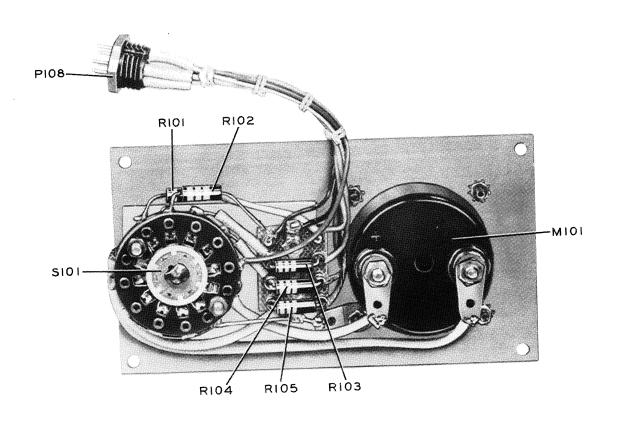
Transceiver 618S-1, Front Panel, Meter Panel, Rear View
